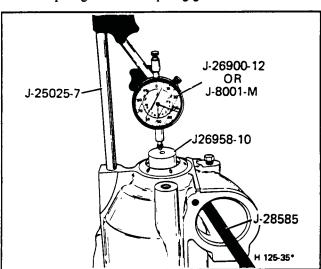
Final Drive End Play Selective Thrust Washer Measurement (680)
